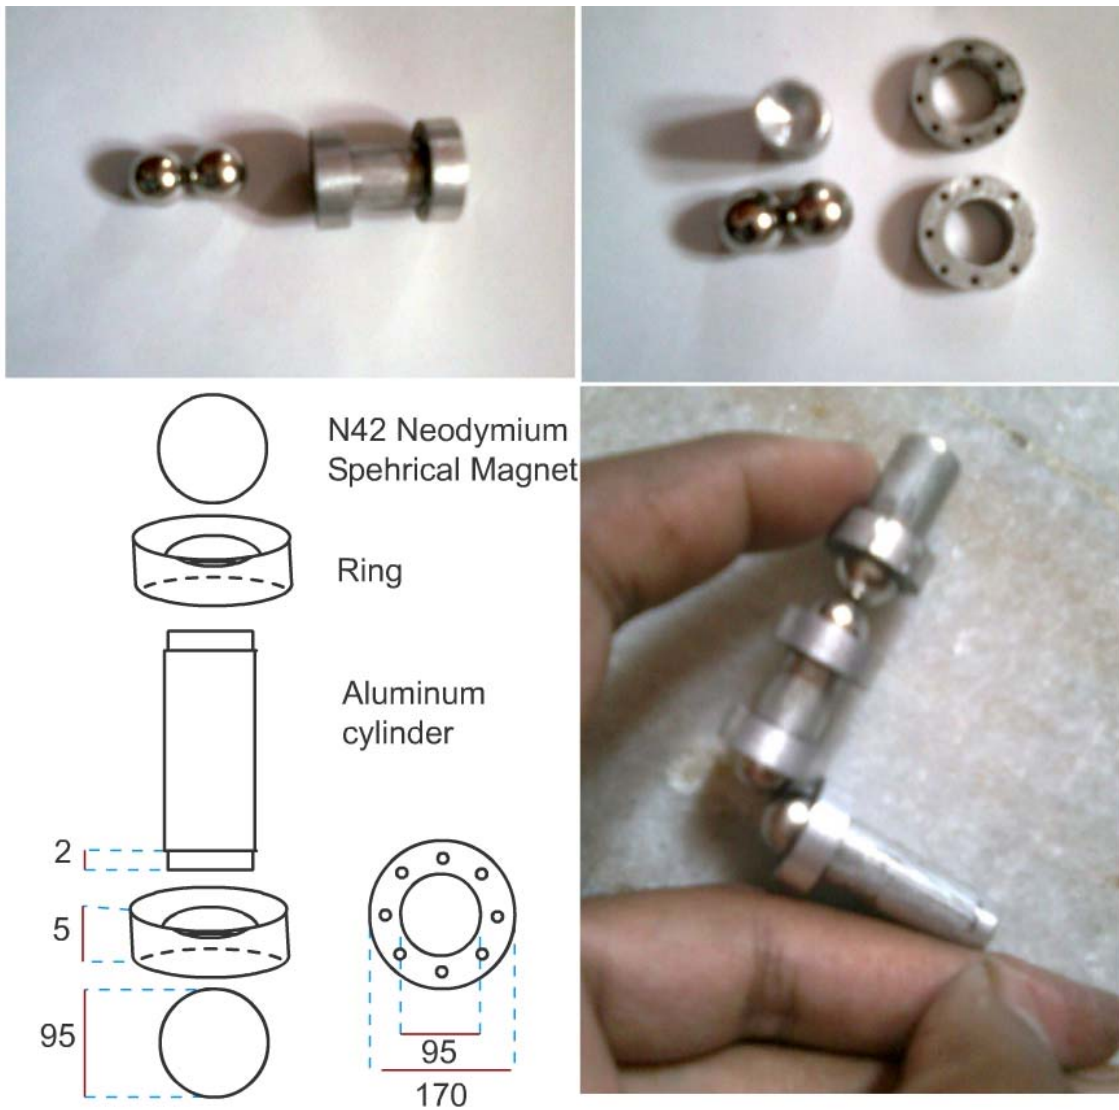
Robotic hand joint using Spherical magnetic rolling and sliding joints CAD and prototype
